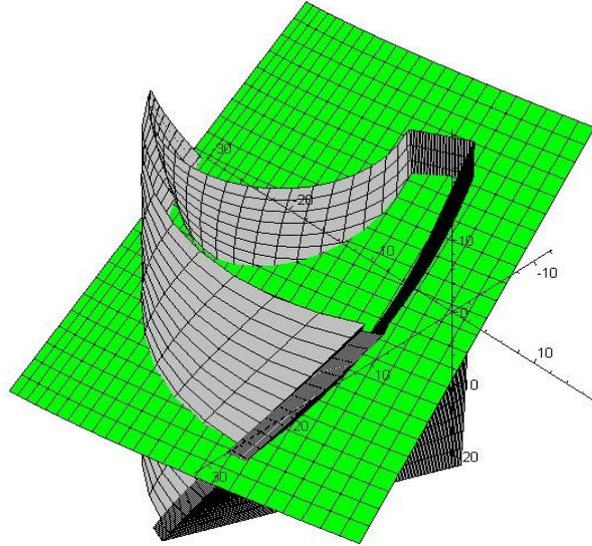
Cutting the helical part of the drill shaft with conical surface
